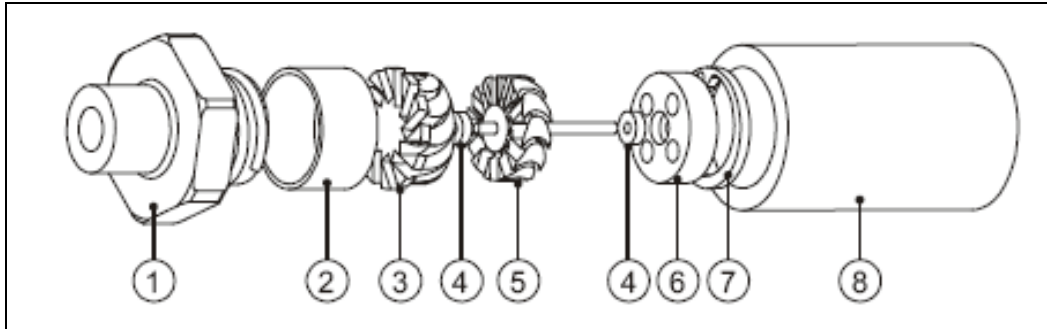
Exploded View of the Microturbine showing the Individual Components: 1. Pneumatic Connector, 2. Spacer Ring, 3. Nozzle Disc, 4. Bearings, 5. Rotor, 6. Outlet Disc, 7. Circlip, 8. Housing⁷.
